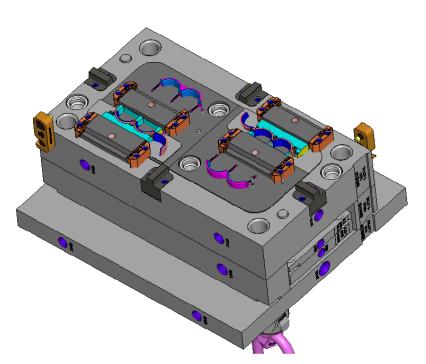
The mould where the inserts are assembled. The light blue inserts are sliding mechanisms. One of them is to be manufactured by an hybrid process.
